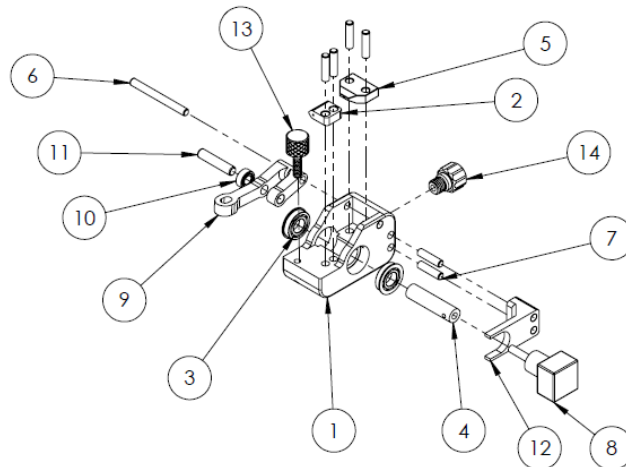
Diagram of a wire feed of a MIG welding machine. [32]
